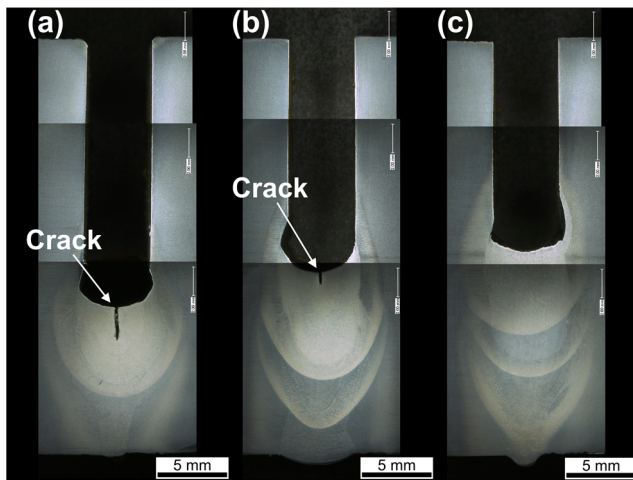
Effect of the laser heat input on multi-pass laser welding with filler wire addition: a 0.9 kJ/mm, b 1.05 kJ/mm, and c 1.2 kJ/mm
